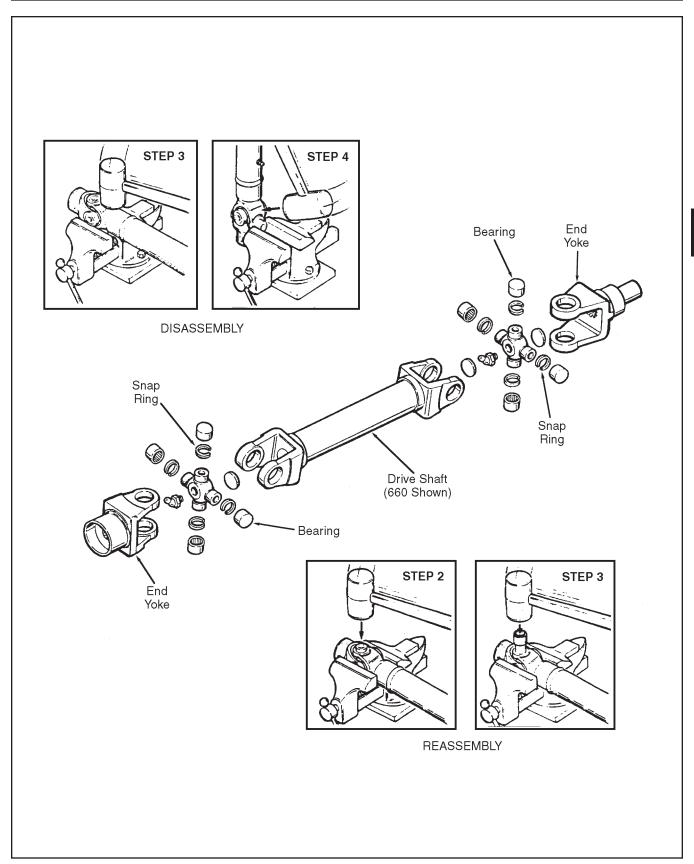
C-3. Drive Shaft Disassembly and Reassembly
